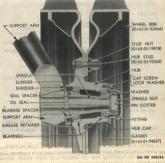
Track Wheel Disks, Hub, Bearings, and Seal—
